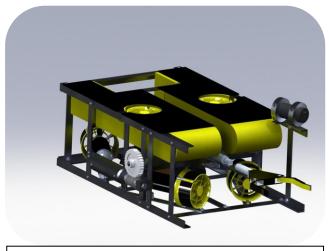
Solidworks drawing of ROV Competence with its buoyancy cartridge in place
